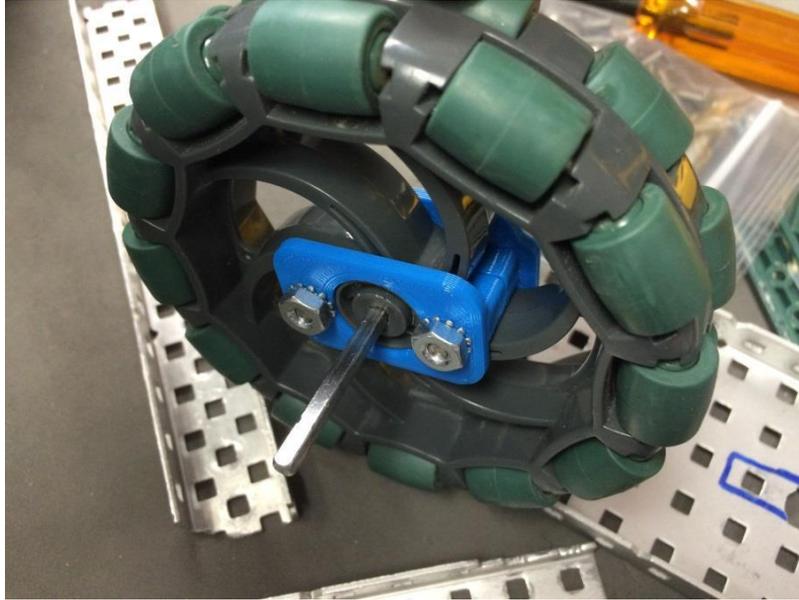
Wheel Lock Attachment on 4" Omni Wheel (Shaft Bar Lock on other side)
